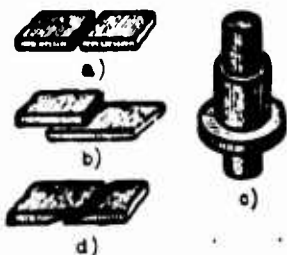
Basic types of soldered joints: a) butt; b) overlap; c) bushing joint; d) oblique butt.
